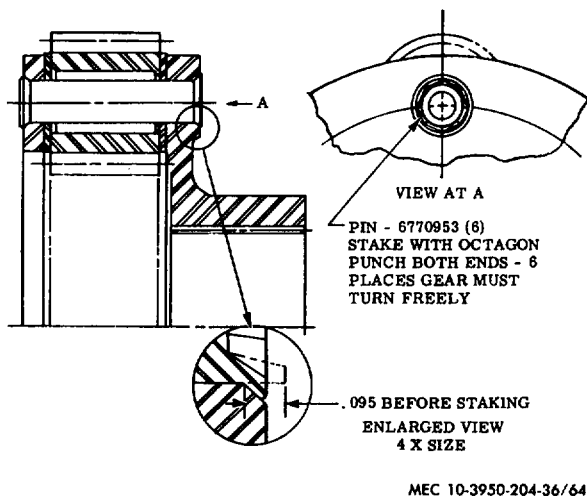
Low-range planetary carrier assembly, cross section, showing spindle dimensions.
